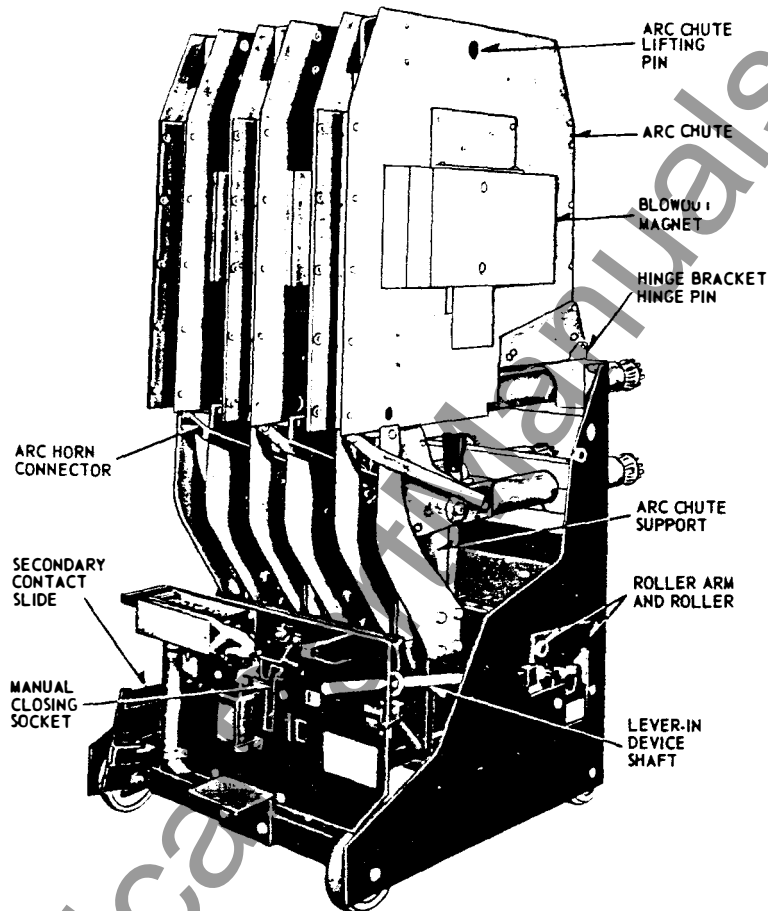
CIRCUIT BREAKER WITH MAIN BARRIER REMOVED
